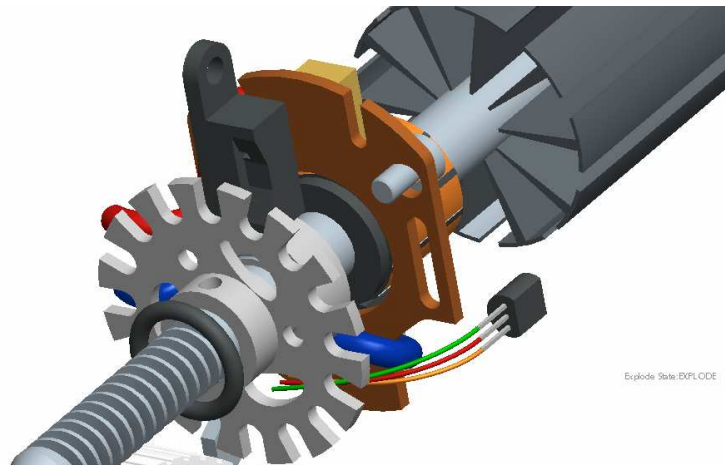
GEARBOX SHOWING SHAFT ENCODER AND TEMPERATURE SENSOR
